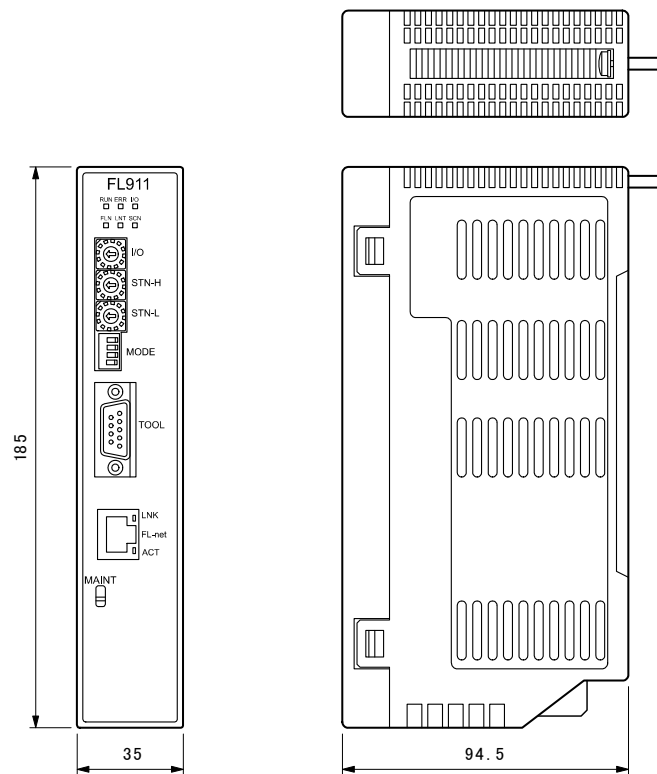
FL911/ MD911/ EN911 outside dimensions
